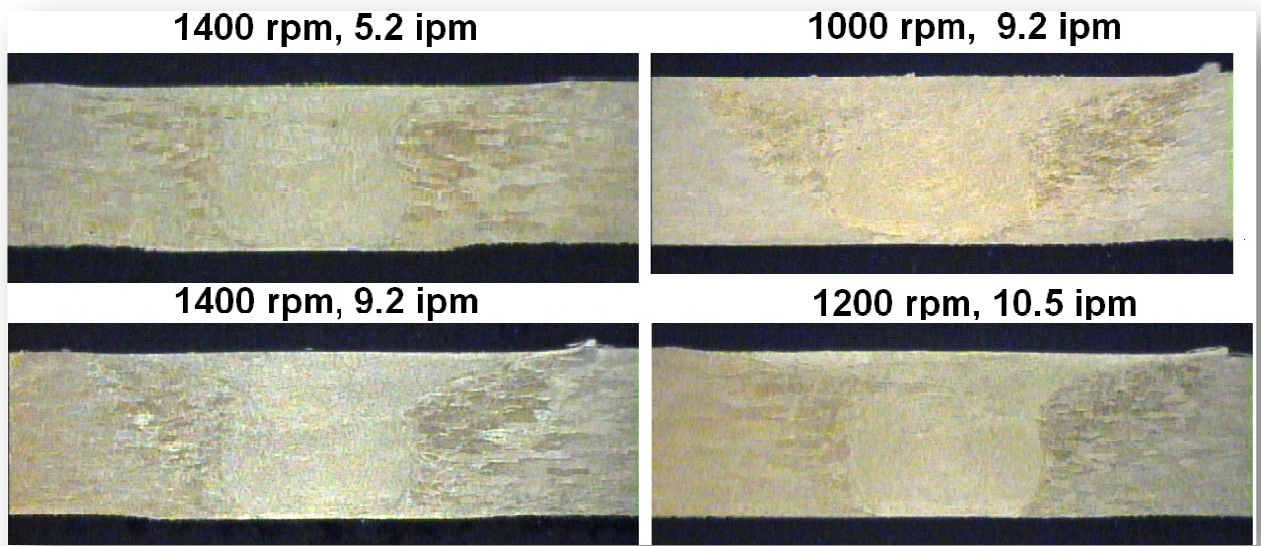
Macrosections of selected welds made with the narrow probe tool.
